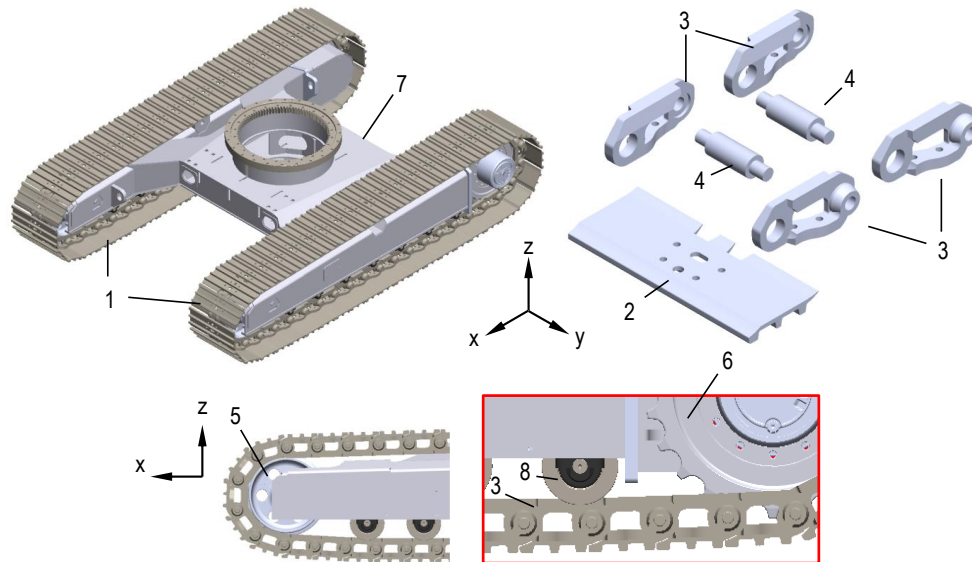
General view of the steel crawler system used in an excavator and layout of structural elements [9]
